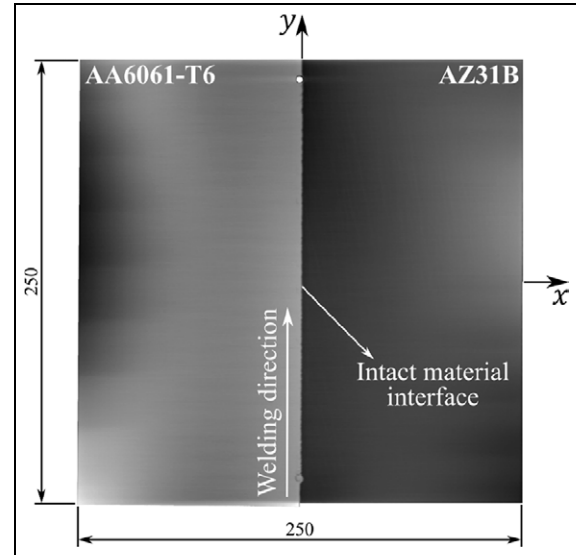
A through-thickness cross-sectional view of the welded test specimen, from a CT scan, showing its intact weld condition. Dimensions are in mm.
